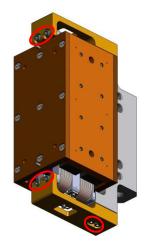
Bolt on (2) Thermal Bars. Surfaces must make good contact to properly pull heat out of Bobbin.
